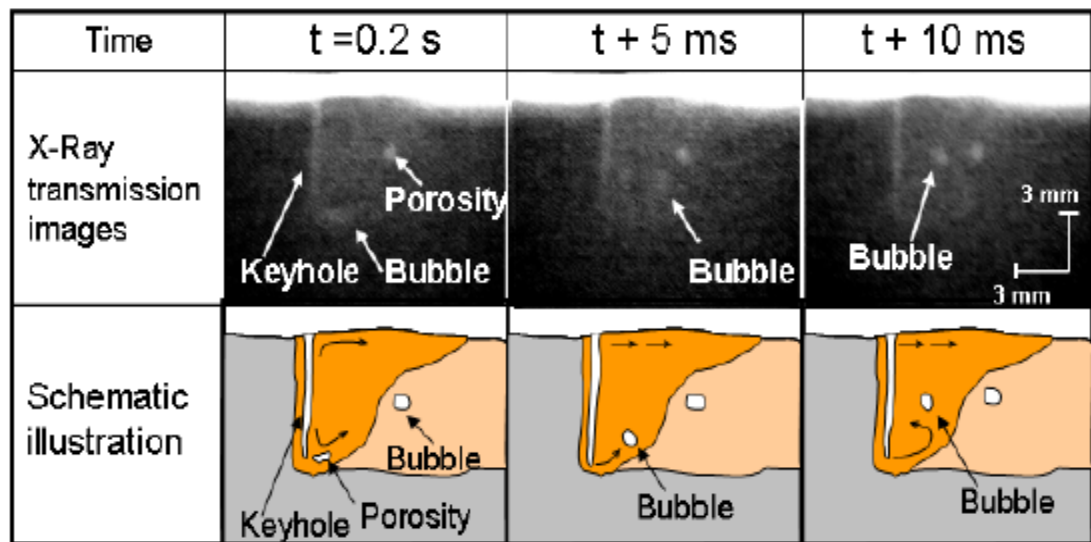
Detection of welding porosity and bubble of using X-ray imaging system [29].
